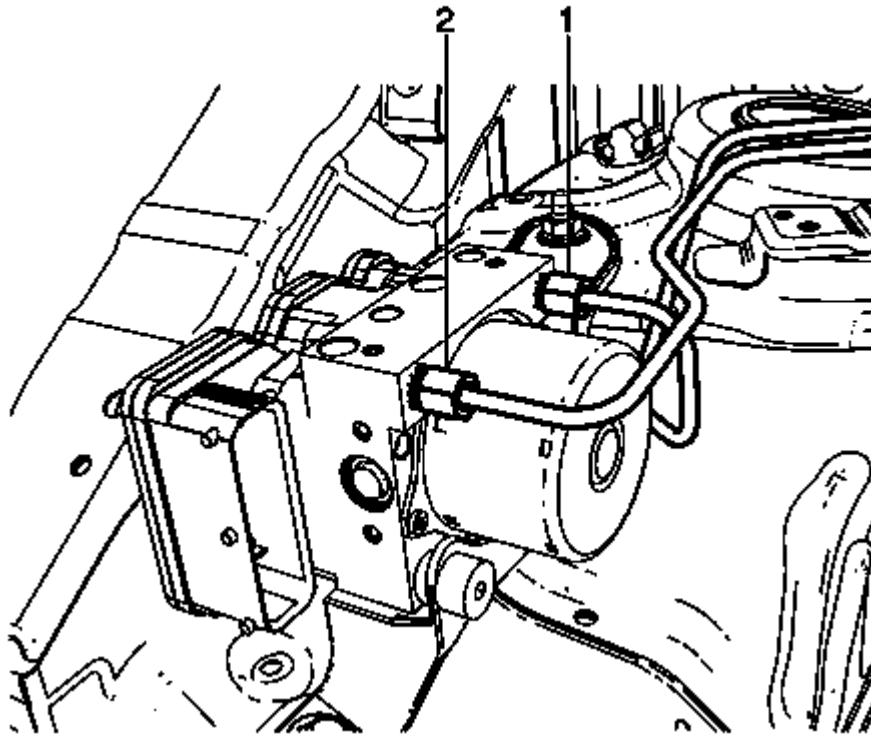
Master Cylinder Primary Brake Pipe Fitting
